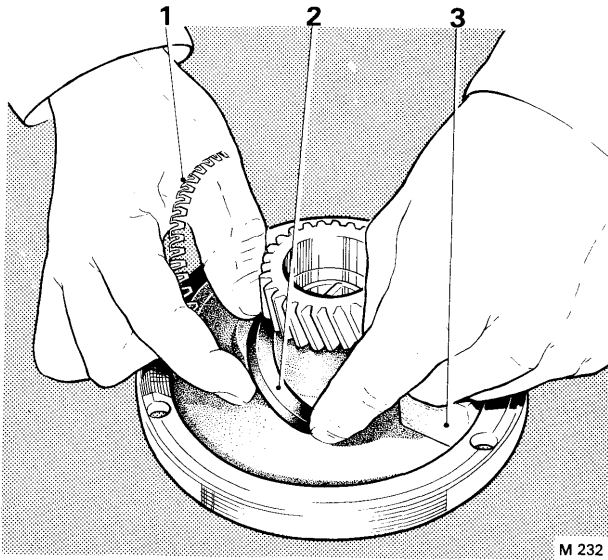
FITTING EXPANDER AND SEAL TO CLUTCH COVER
